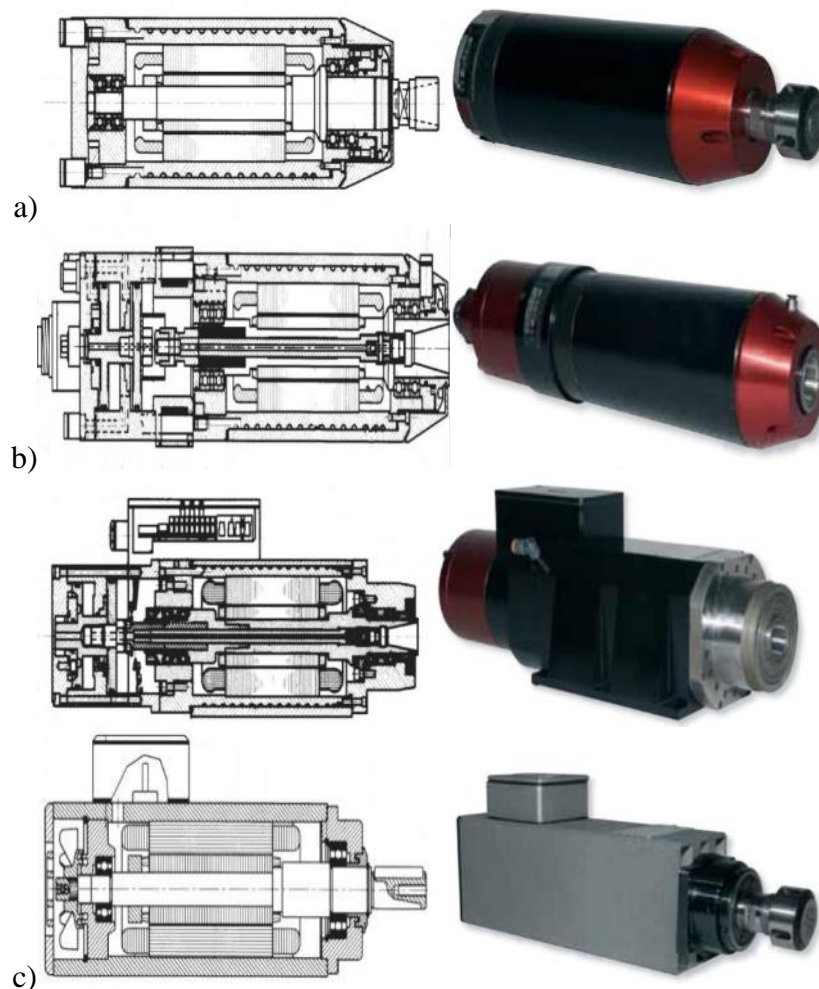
Motor spindles with magnetic (a) and hydrostatic (b) bearings
